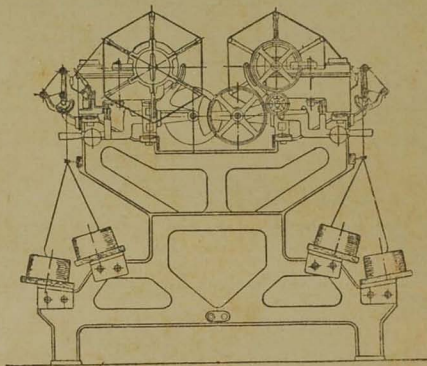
Artificial Silk Manufacture. Cake to Hank Reeling Machine.
